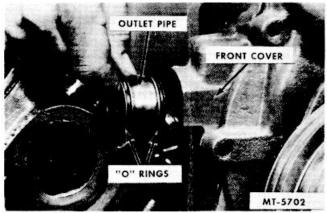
Removing Water Outlet Pipe and "O" Rings
